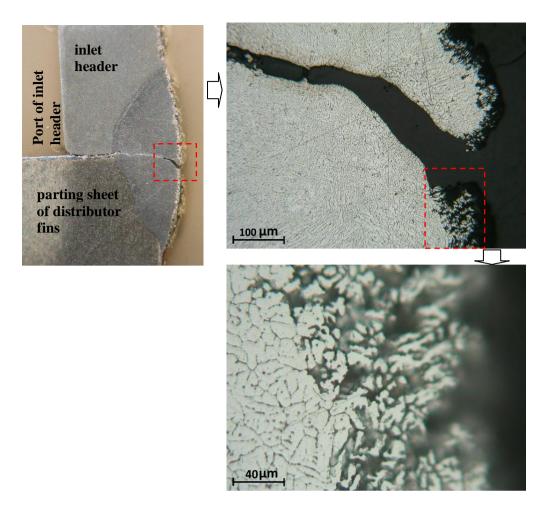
Microstructure obtained from the weld joint between header and parting sheet of distributor fins at location as indicated (etched with Keller solution)
